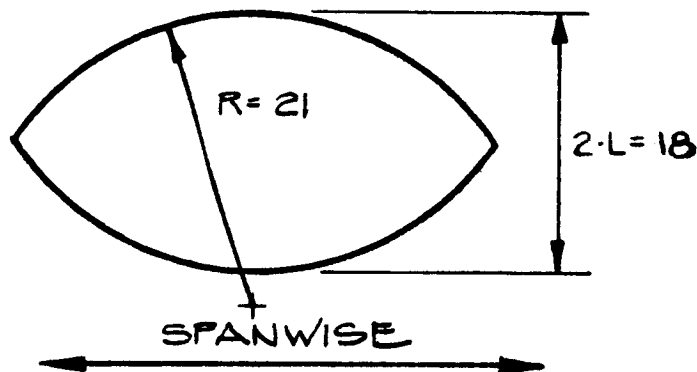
Tension Side Low-Speed Shaft Hole Geometry
